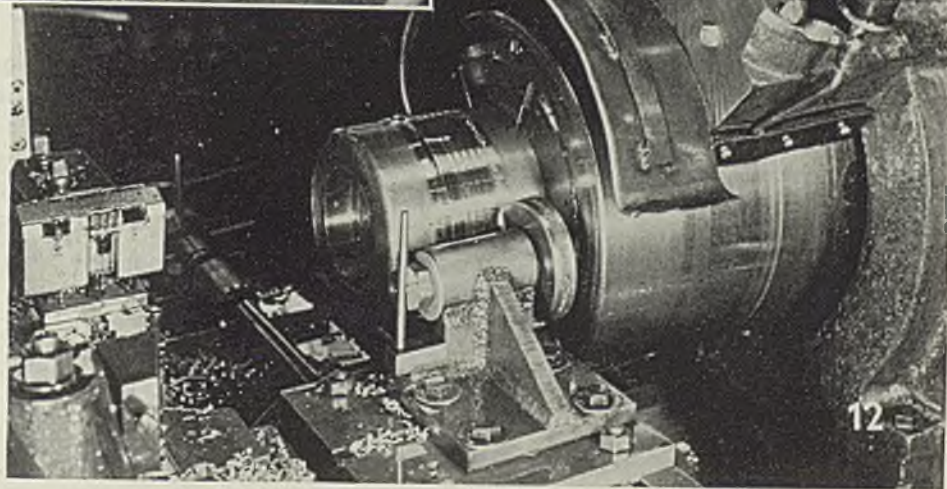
Last operation performed on the turret lathe shown in Fig. 11 is stamping the copper band. The stamping tool is located on the back side of the turret and rolls against the band to mark it. Skiving tool also is on this side of the lathe, part of it being visible at lower left
